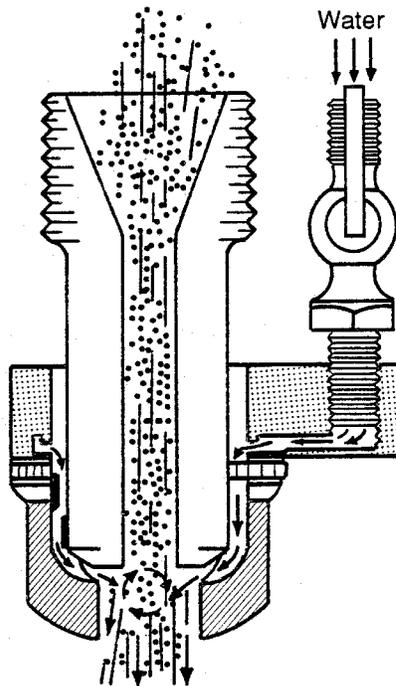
Adapter nozzle converting a dry blasting unit to a wet blasting unit.
